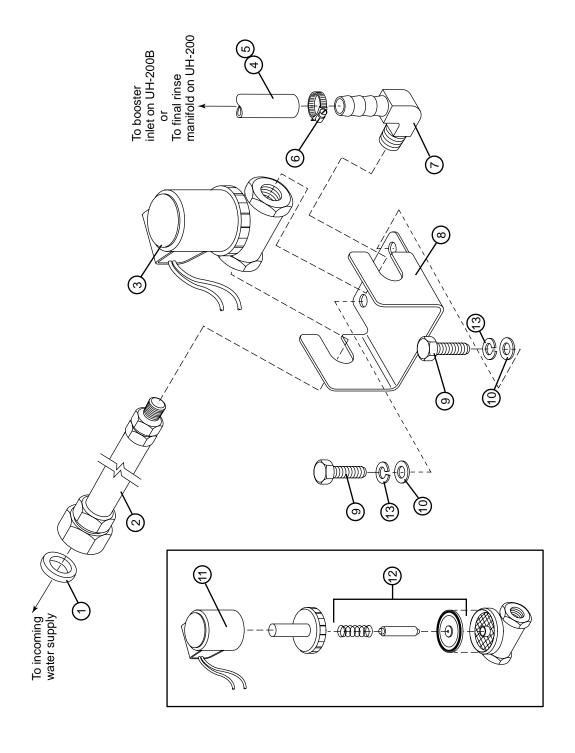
Fill/Rinse Valve Assembly (UH-200B, UH-200)
